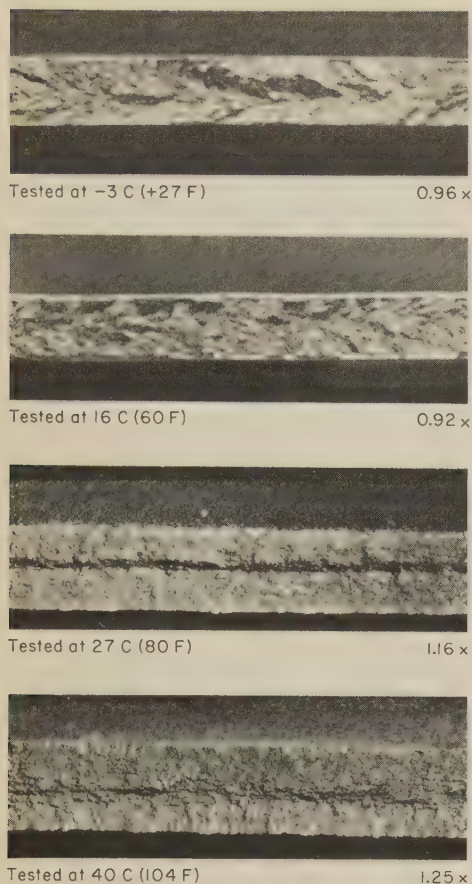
Changes in mechanism of fatigue-fracture propagation in aluminum-clad aluminum alloy 7075-T6 plate. The fracture marks changed with changes in stress intensity as the crack moved toward the top.
